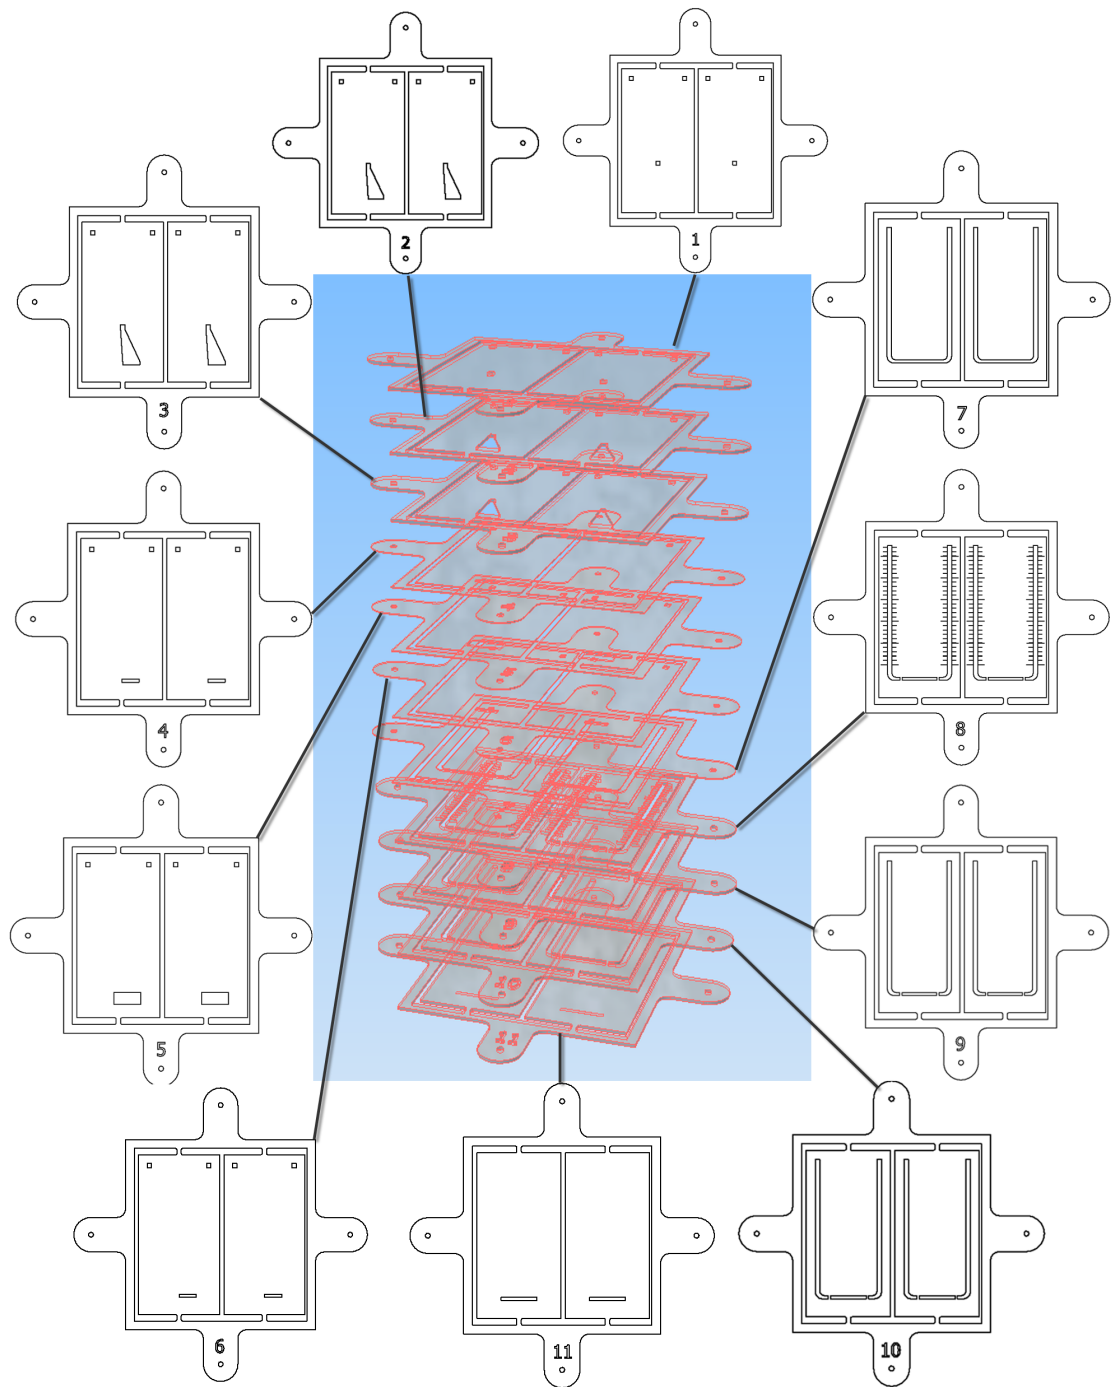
Explosive view of the device design with 2D drawing of each layer.
